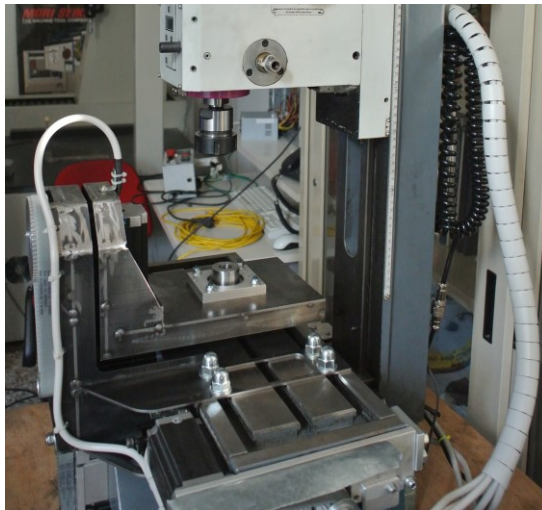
The complete roto-tilting table after the welding operations mounted on the machine for testing purposes
